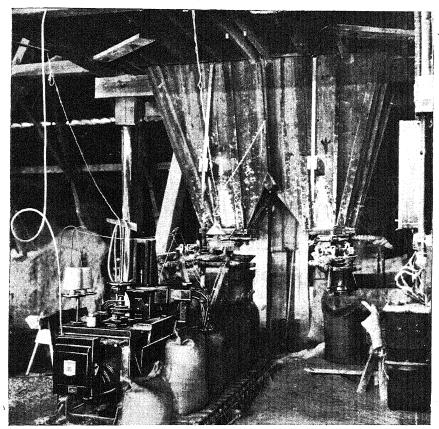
BAG-SEWING MACHINE WITH CONVEYOR
